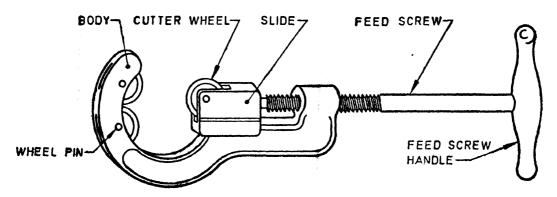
, THREE-WHEEL TYPE PIPE CUTTER FOR CUTTING PIPE 45 TO 315 mm DIAMETER INCLUSIVE, TYPICAL
